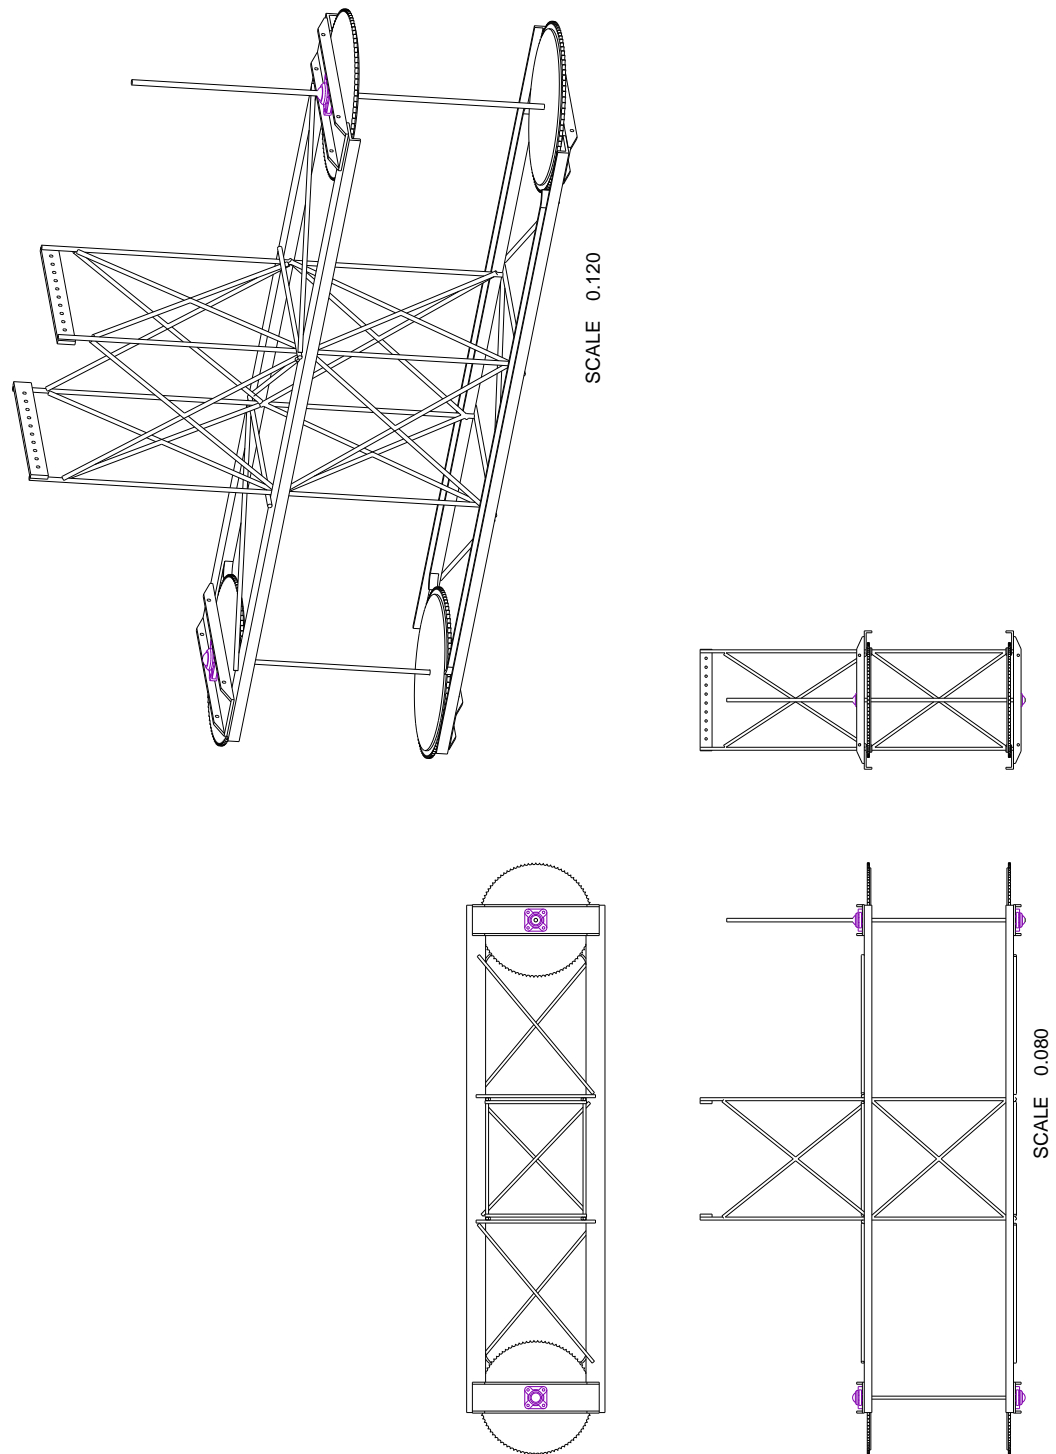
Drawing of the aluminium PII structure. Bearings, sprockets, and shafts are included. The pulley and its supporting structure are not shown.
